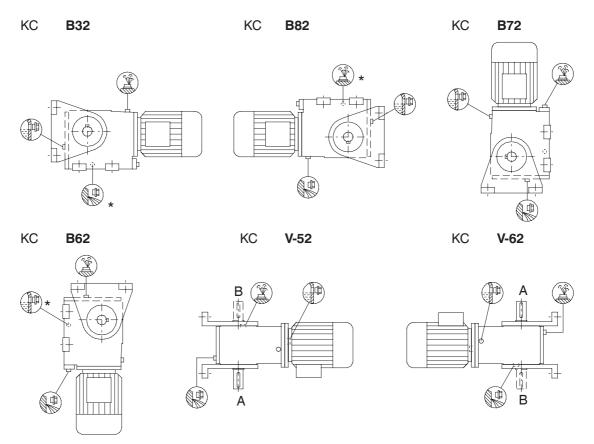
Mounting positions for KC Size 40 - 180
